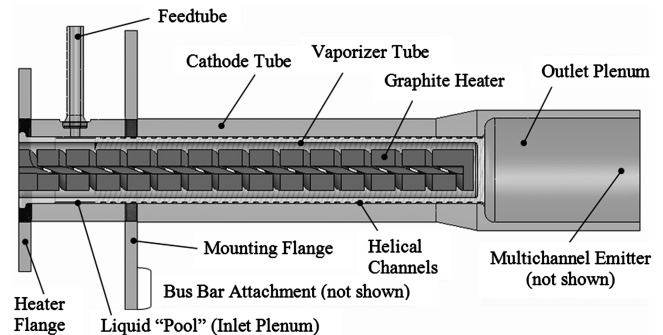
Axial cutaway drawing of the cathode assembly showing all main components/features of the cathode assembly.
